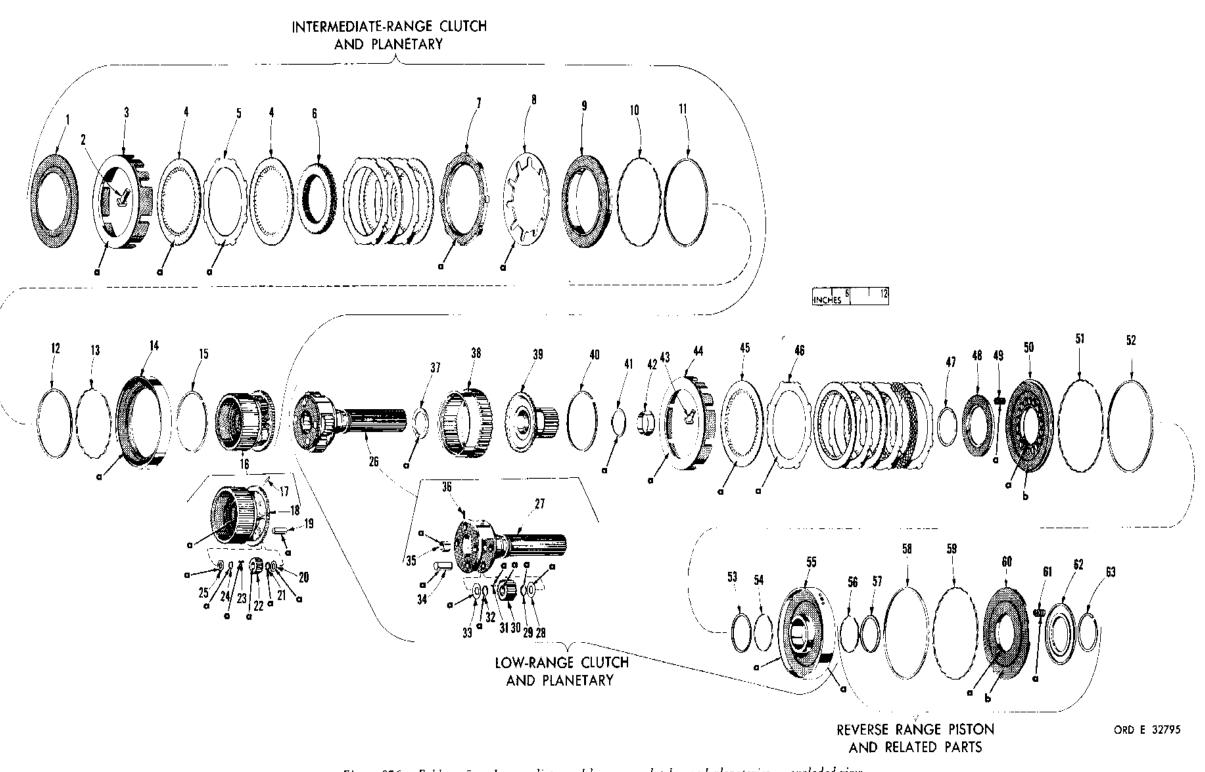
Fold-out 5 — Intermediate- and low-range clutches and planetaries — exploded view
